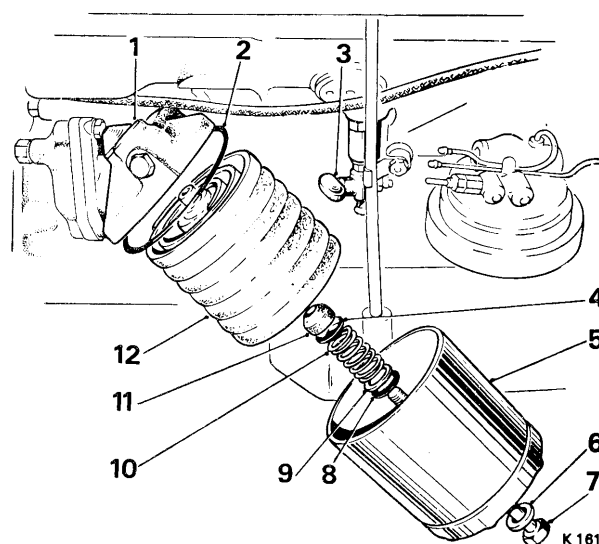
EXPLODED VIEW OF FILTER ASSEMBLY
